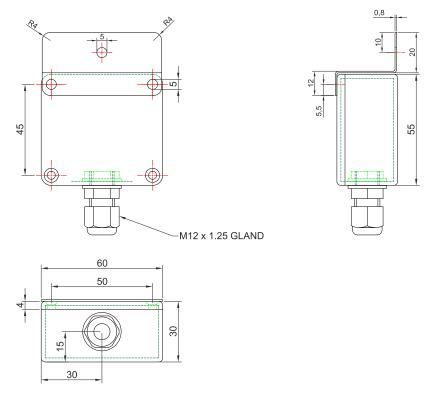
AlarmLine II Analogue EN EOL unit Dimensional Drawing
